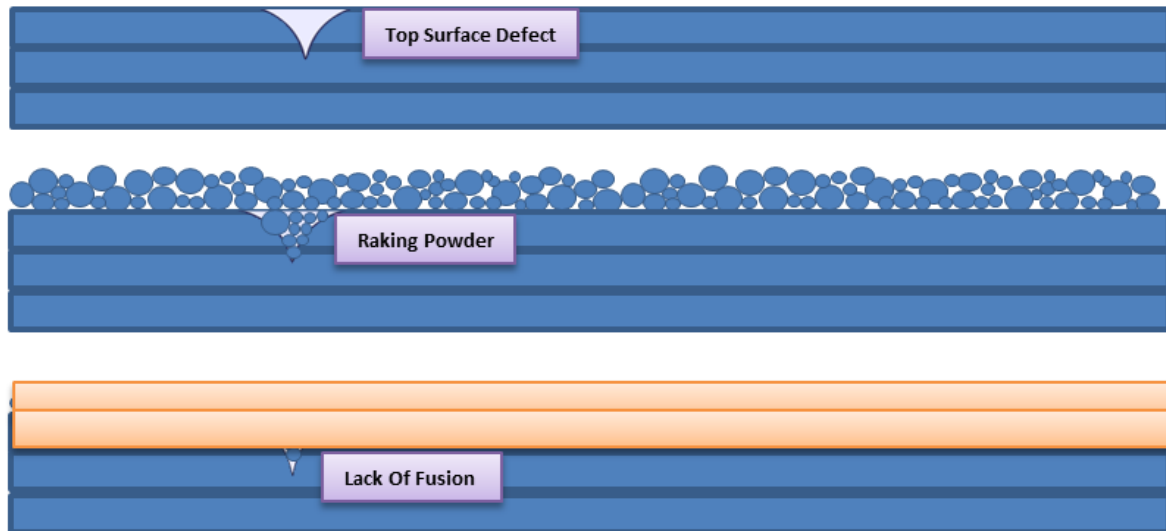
single layer LOF where melt pool could not penetrate deep enough, thus a defect is remain underneath the surface (schematic drawings)
